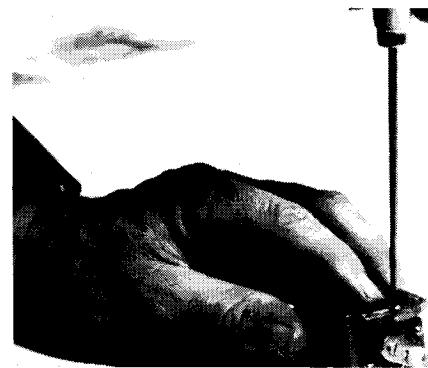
When the lever shaft is being fitted or removed, the lever must be held with the finger.
